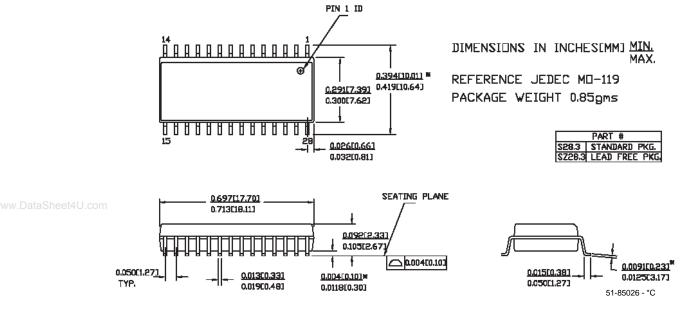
28-Lead (300-Mil) Molded SOIC
